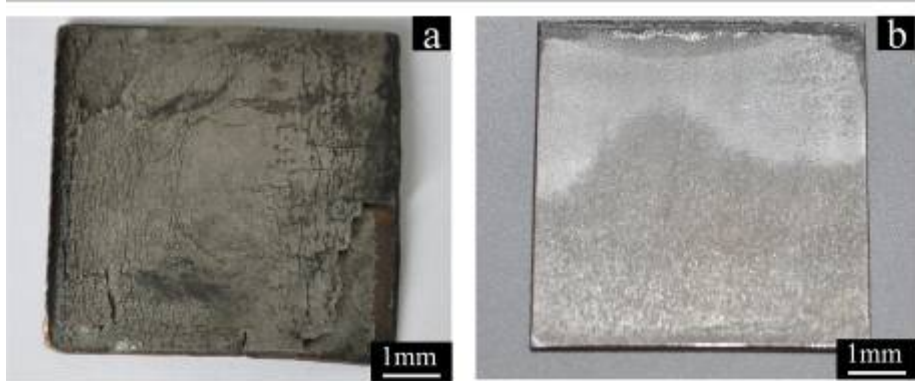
Explosive welding of Cu/W pair without (a) and with (b) preheating.
